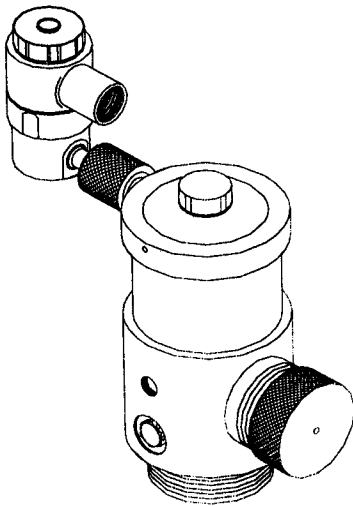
Side Mounted Electrical Actuator & Solenoid Adaptor Location (Note: Cannot be used with 3 in. valve)
